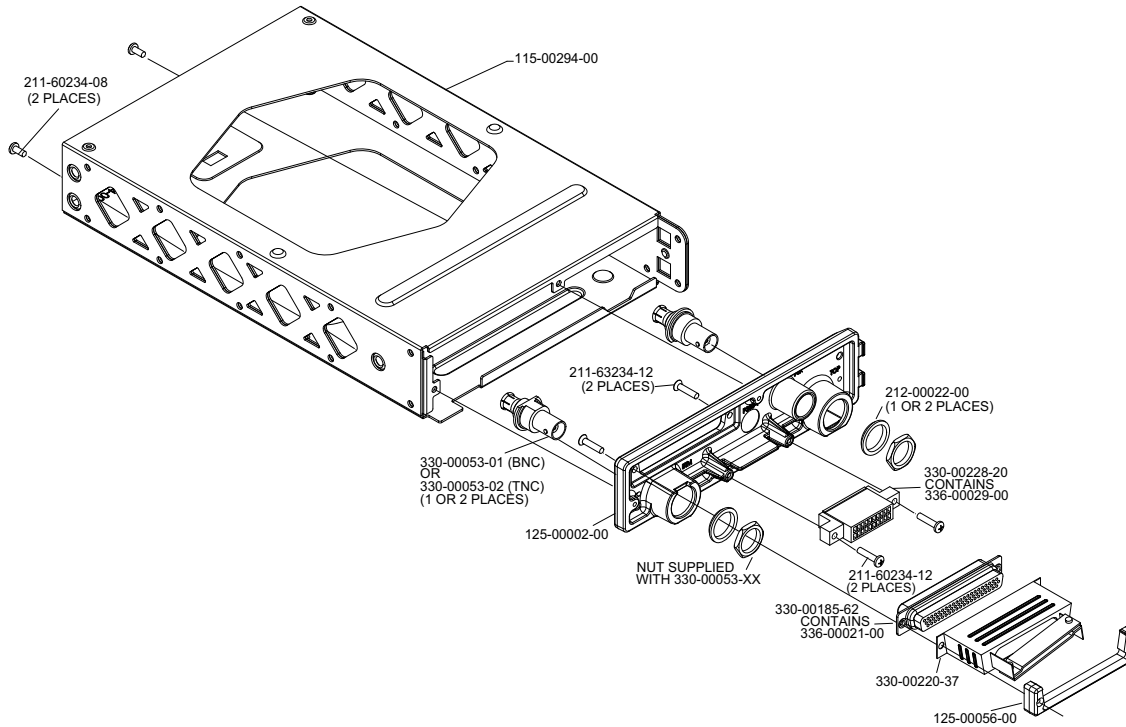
GTX 330 Mounting Rack/Connector Assembly
